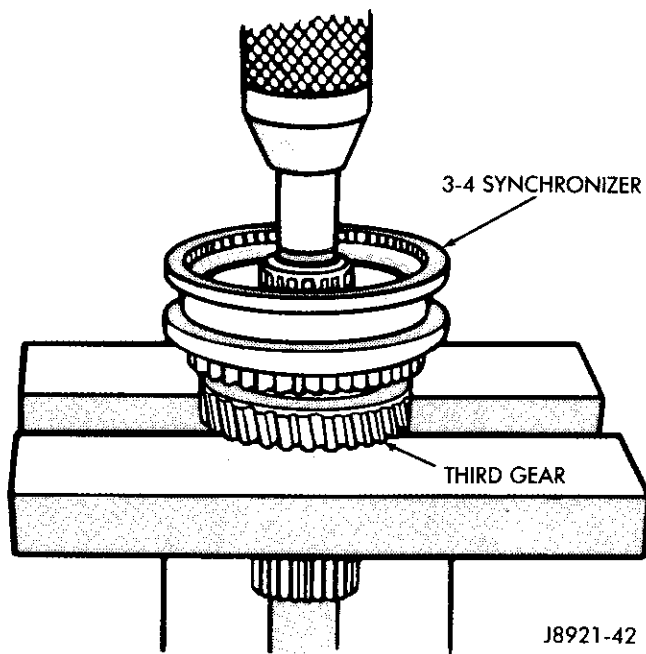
Removing 3-4 Synchronizer And Third Gear
